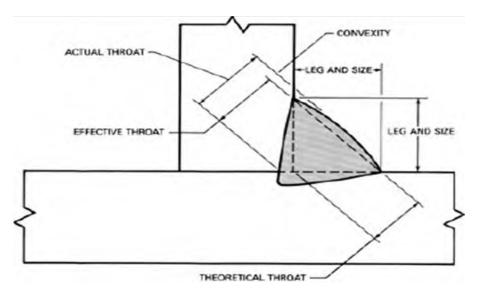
Cross section of a convex fillet weld. Fillet weld size and leg dimension are equal.
